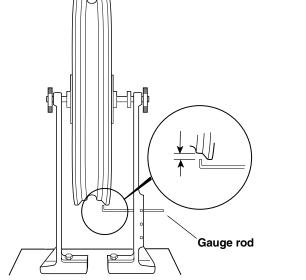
Checking Cast Rim Radial Runout Using Wheel Truing and Balancing Stand (HD-99500-80)
